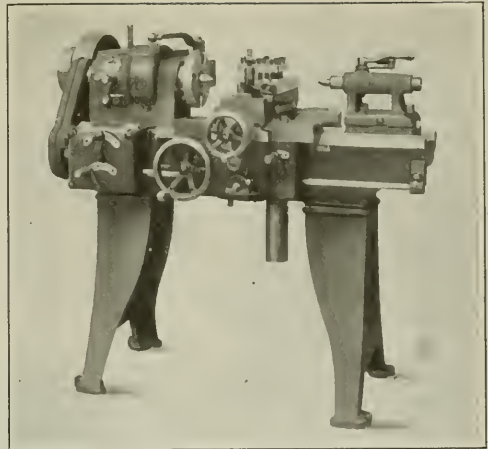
Eleven-inch Rapid-production Lathe placed on the Market by the R. K. LeBlond Machine Tool Co.
